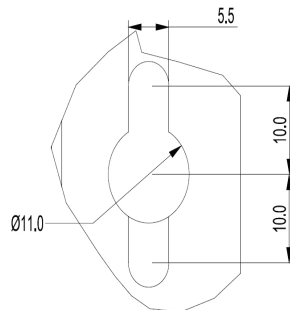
Detail mounting slide hole (wall/table mounting brackets)
